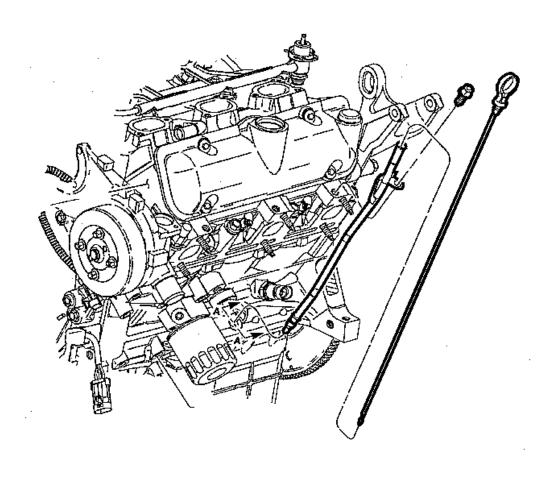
Removing Oil Level Indicator & Oil Level Indicator Tube Courtesy of GENERAL MOTORS CORP.
